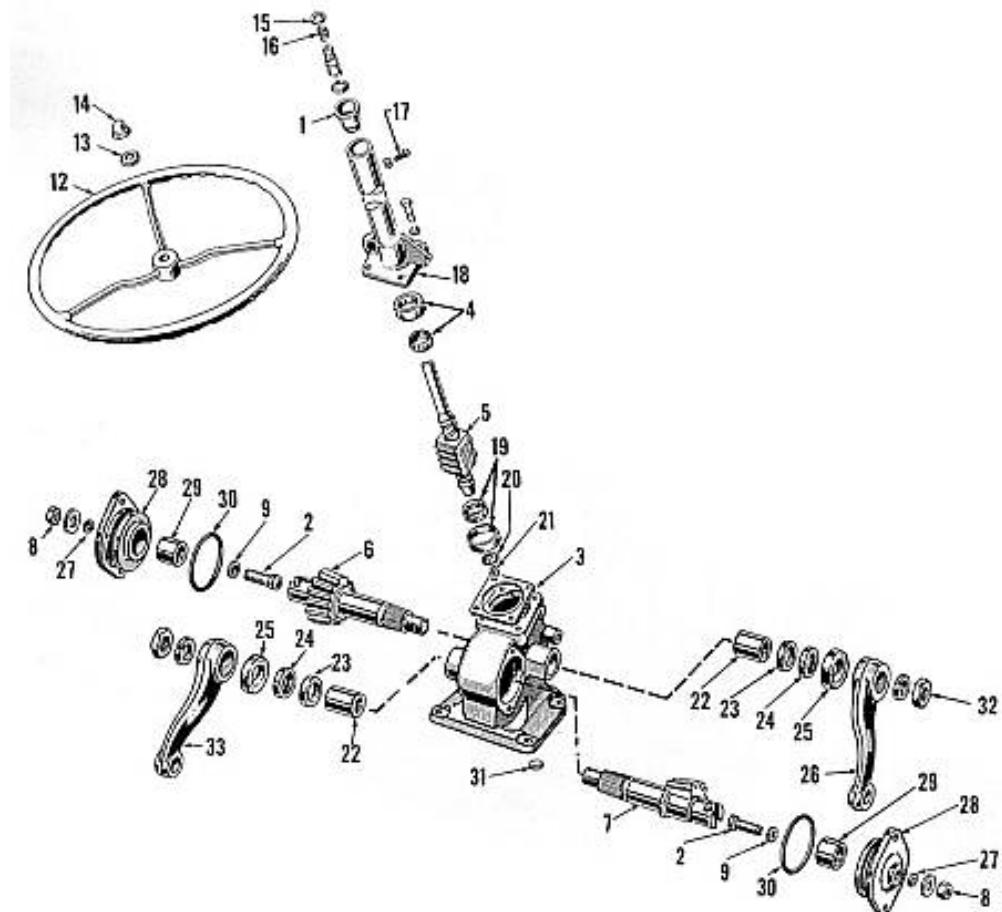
Exploded view of ball nut steering gear used on model 8N tractors after serial 216988. Sectors (7) have tapered teeth, and right sector meshes with ball nut.
